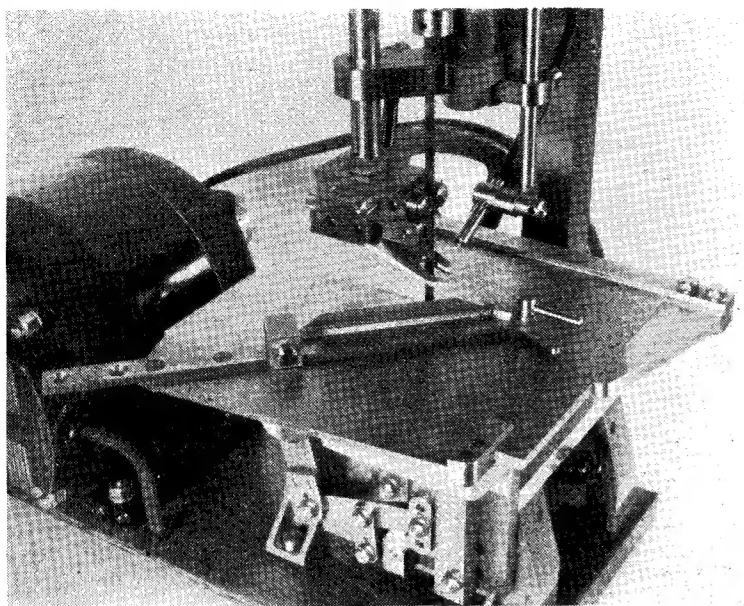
Showing the width-cutting and mitring fences in place on the machine table
